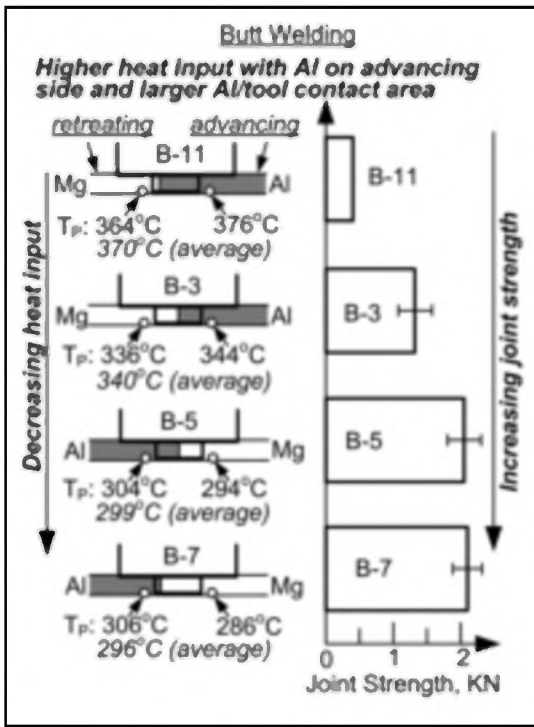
Effect of material position on joint strength and heat input in butt joint FSW of AZ31 Mg and 6061 Al. The thermocouples are 3 mm away from the path of the tool axis and 0.25 mm above the bottom surface of the workpiece.
